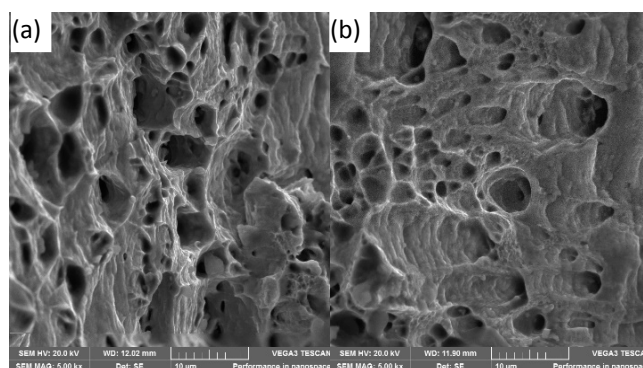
316 stainless steel fracture morphology (a) 0.2Cu; (b) 0.4Cu
